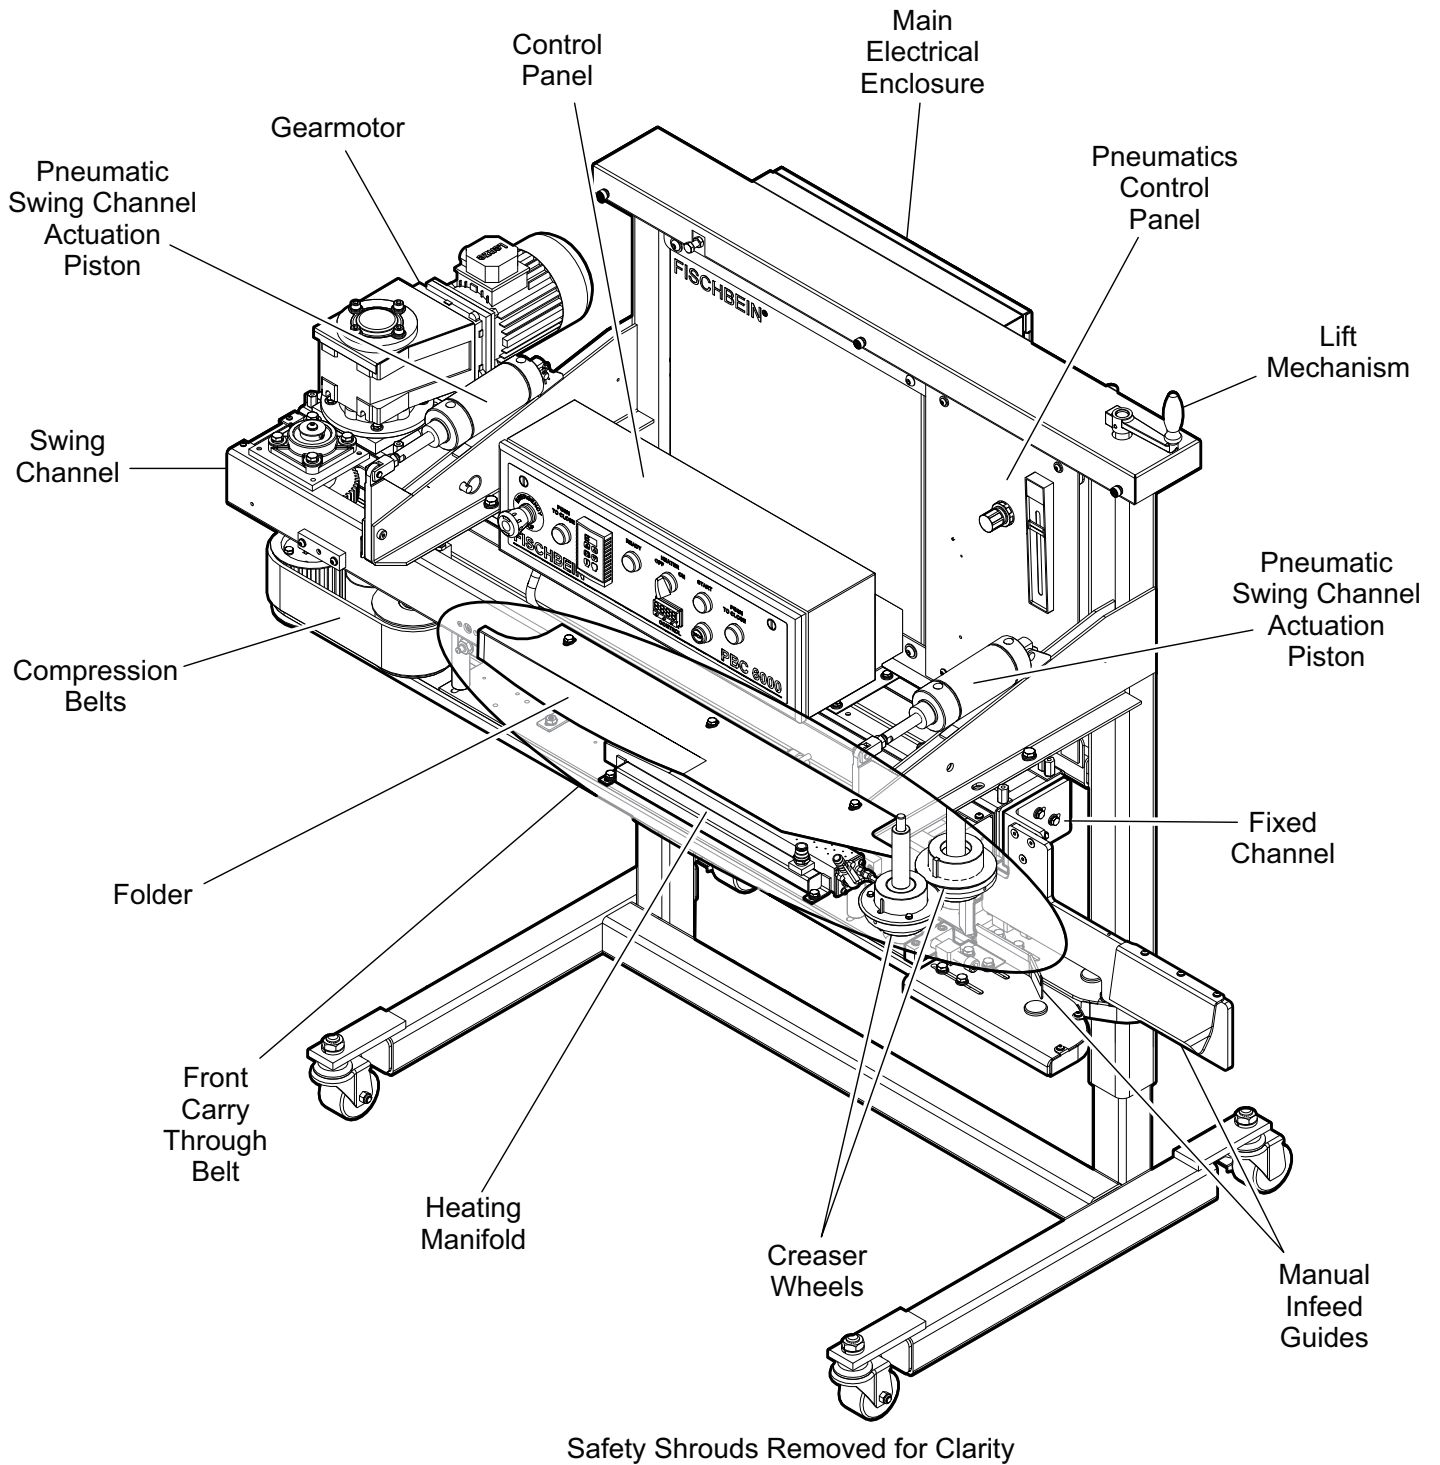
PBC6000 Right-to-Left Pinch Bag Closer Major Components - Front View
